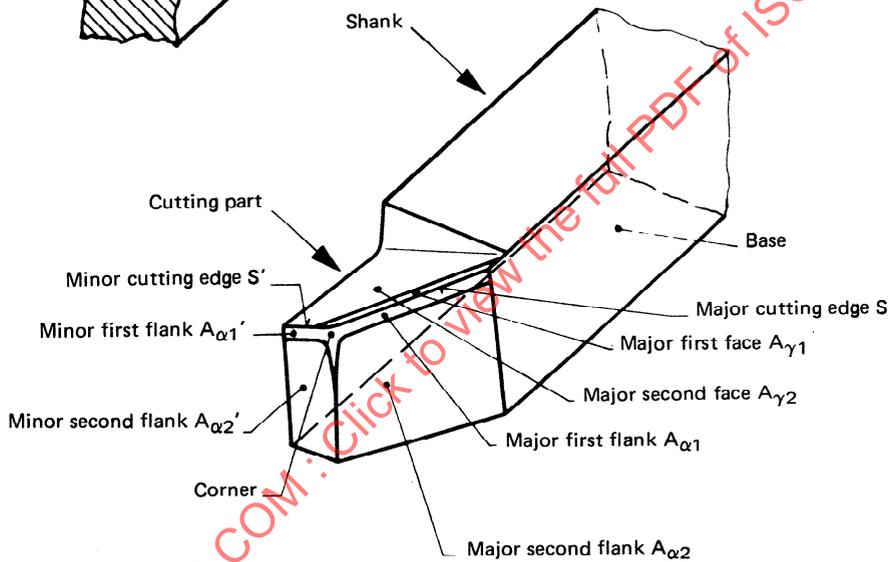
Cutting edges and surfaces on the cutting part of a turning tool
